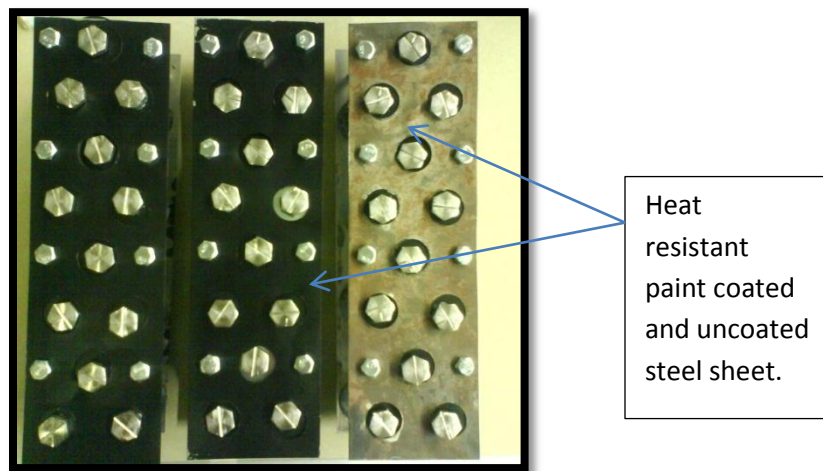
A Photo of Assembled Sample Bombs in the Frame.
